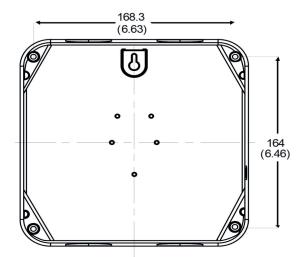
A5xx Controller side view with dimensions in millimeters (inches)
